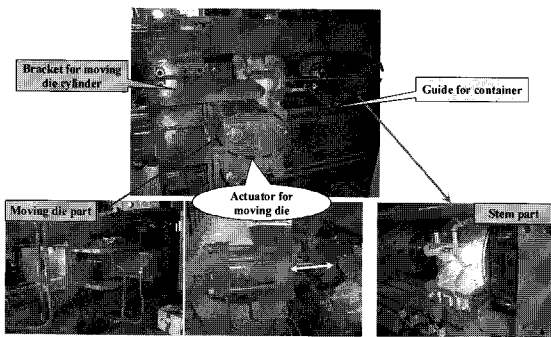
Improved CNC extruder with the first moving cylinder in section extrusion process
